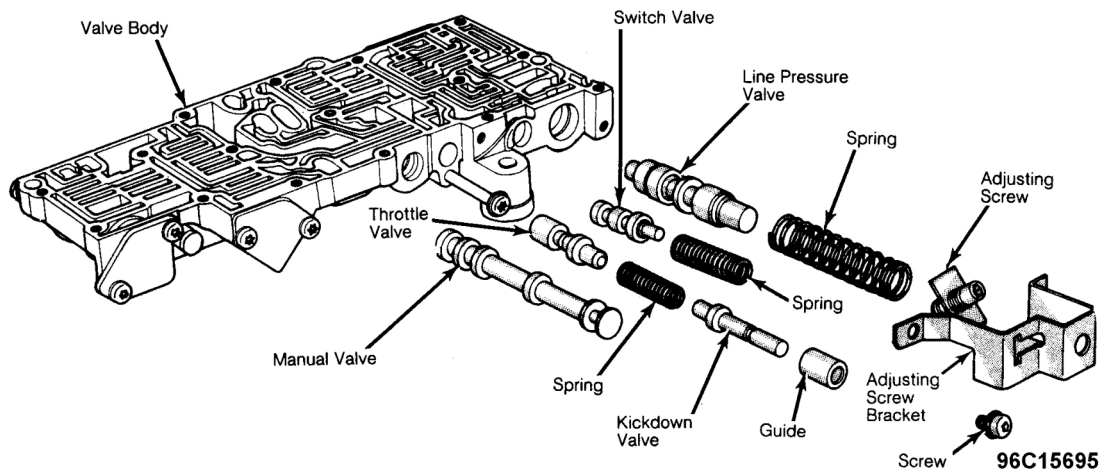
Exploded View of Pressure Regulator & Manual Control Valves
